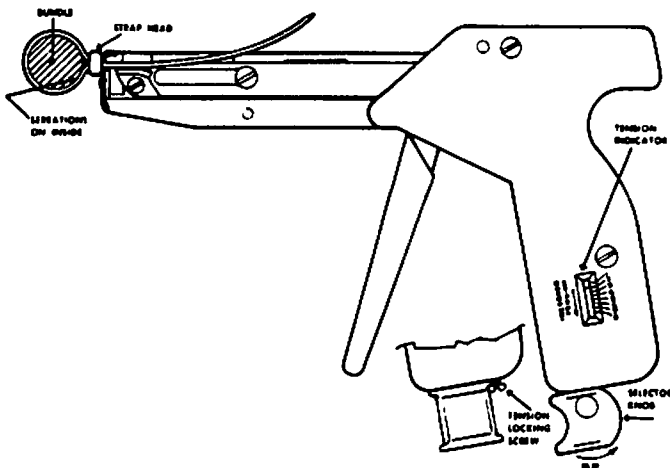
BT200482 Cable Tie Wrap Tool - 10 -
